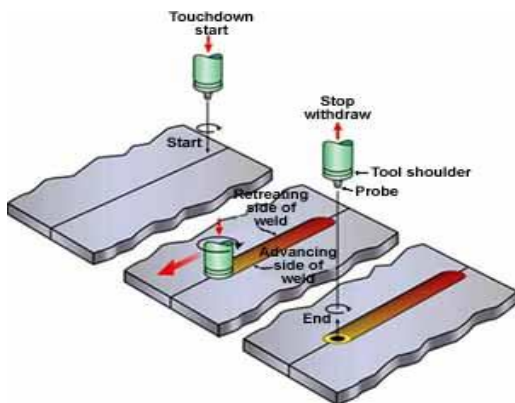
Schematic diagram of Friction Stir Welding [2]
